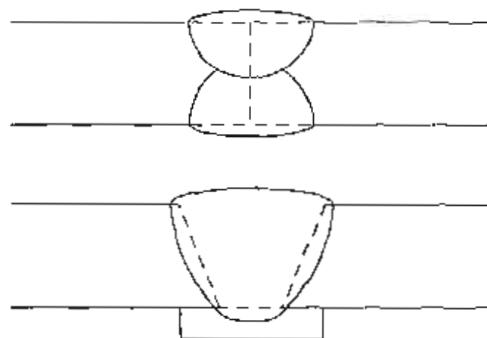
Comparison of two butt-weld designs. In the top weld, a large percentage of the weld pool is base metal. In the bottom weld, most of the weld pool is filler metal.
